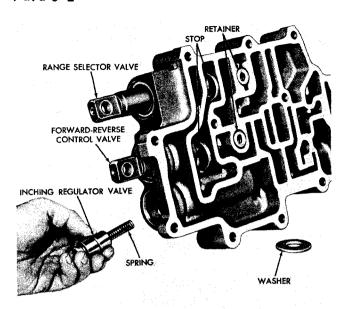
Removing (or installing) inching regulator valve and spring—later model
